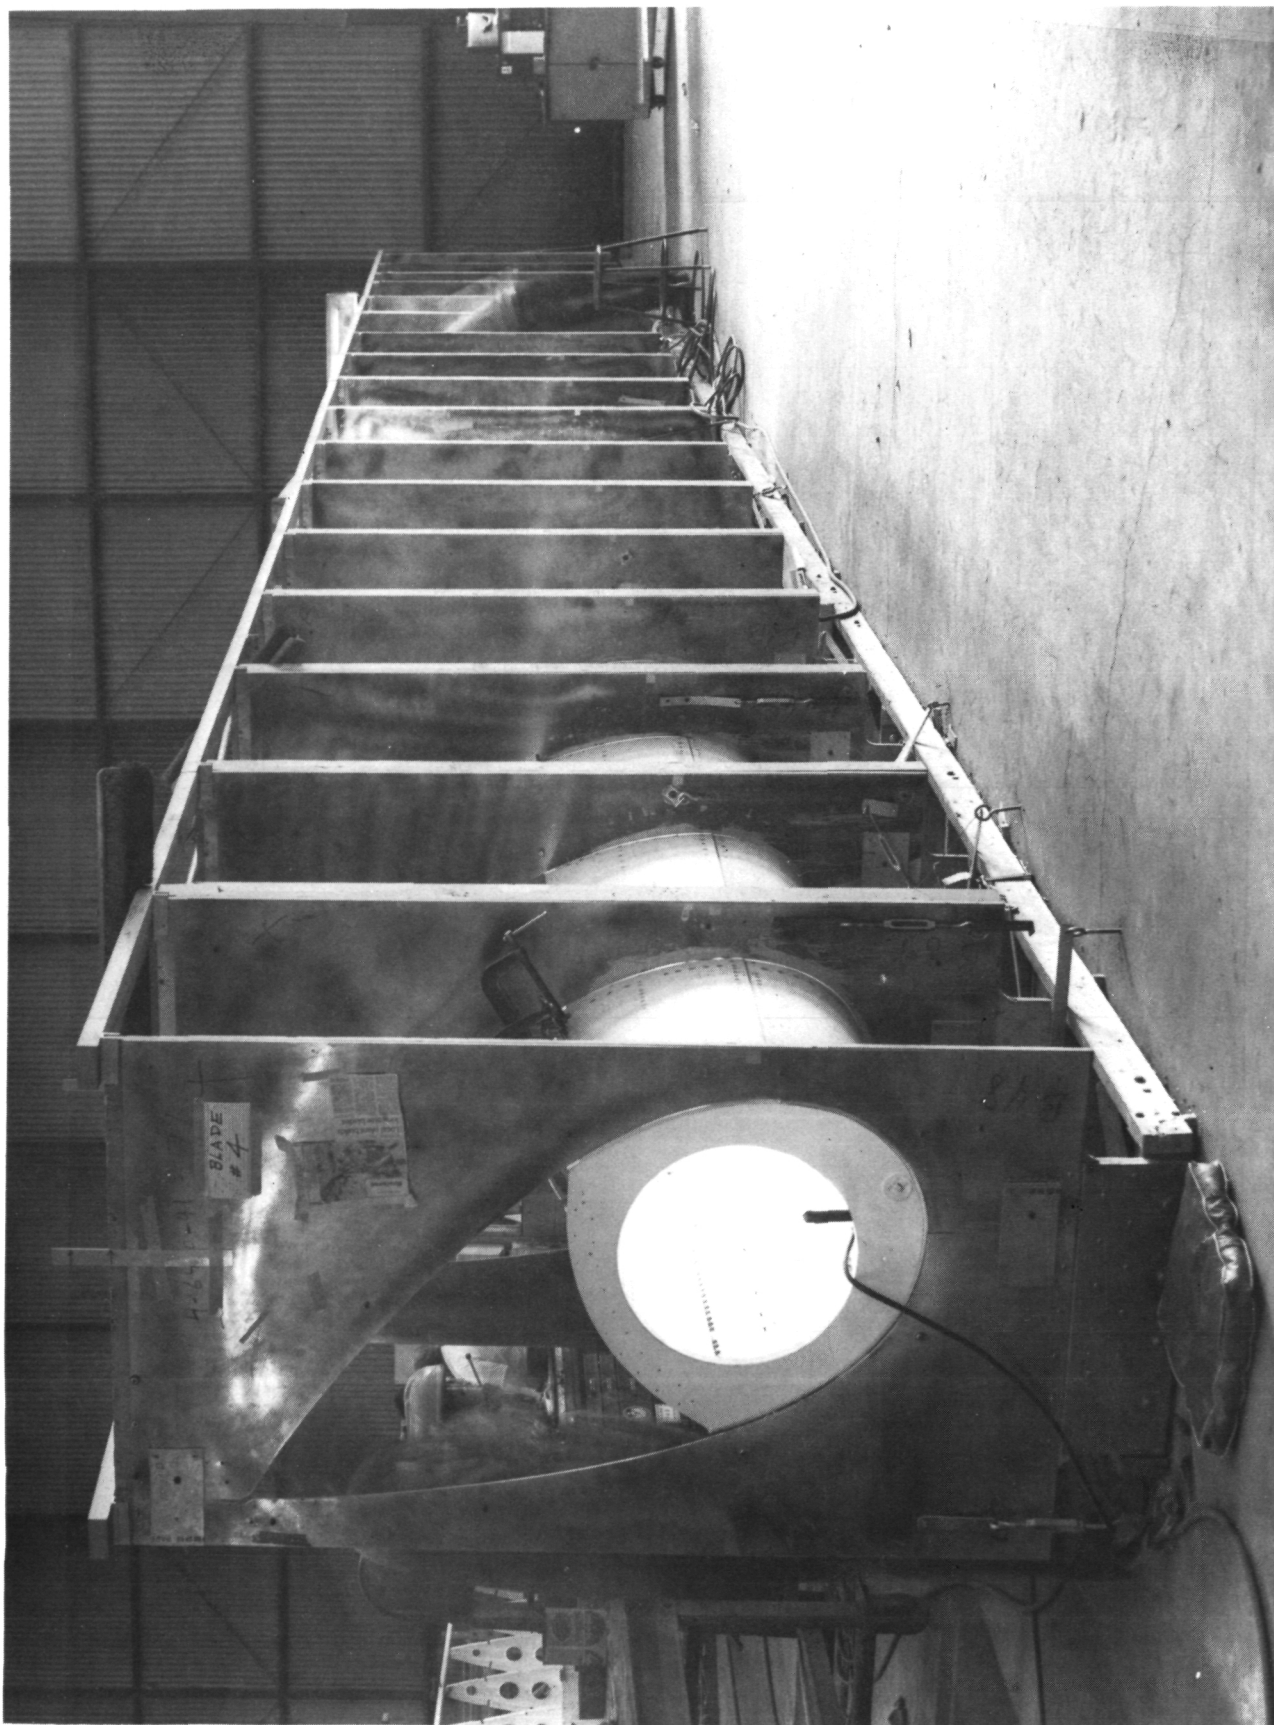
Blade Fixture Jig Showing Length, Twist and Contour Check Points (Sheet 2 of 2)
